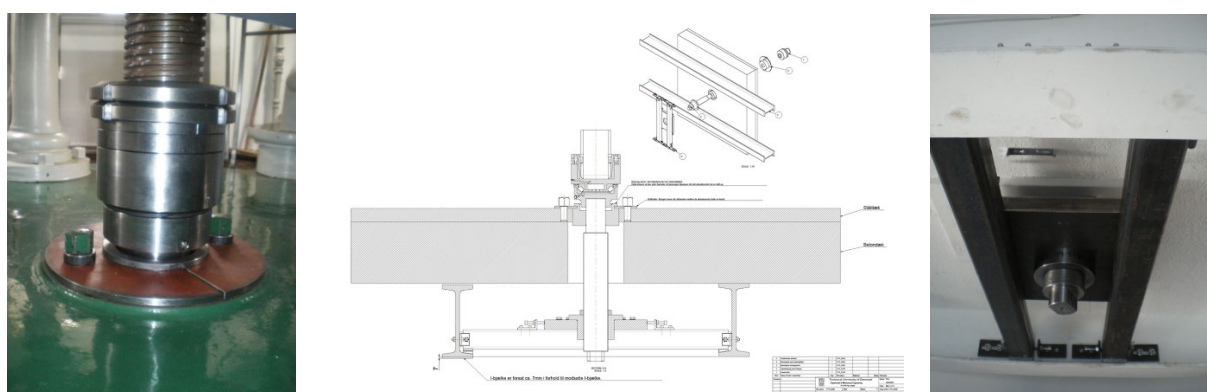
From left to right – new bearing attached on shaft end - adjustable support for new bearing cross section – photo of adjustable support below floor separation.
